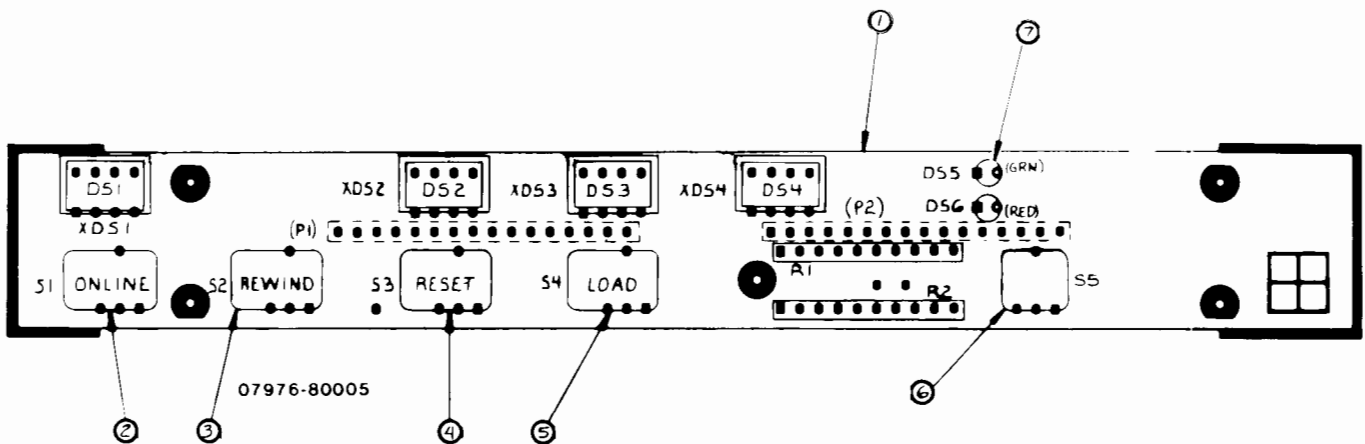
Operator/Self Test Panel PCA (07976-60005) Parts Location Diagram
